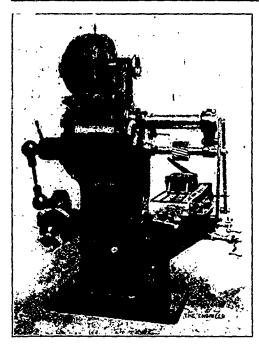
Milling Machine driven by a C-W M tor Controlled by the MV System.
